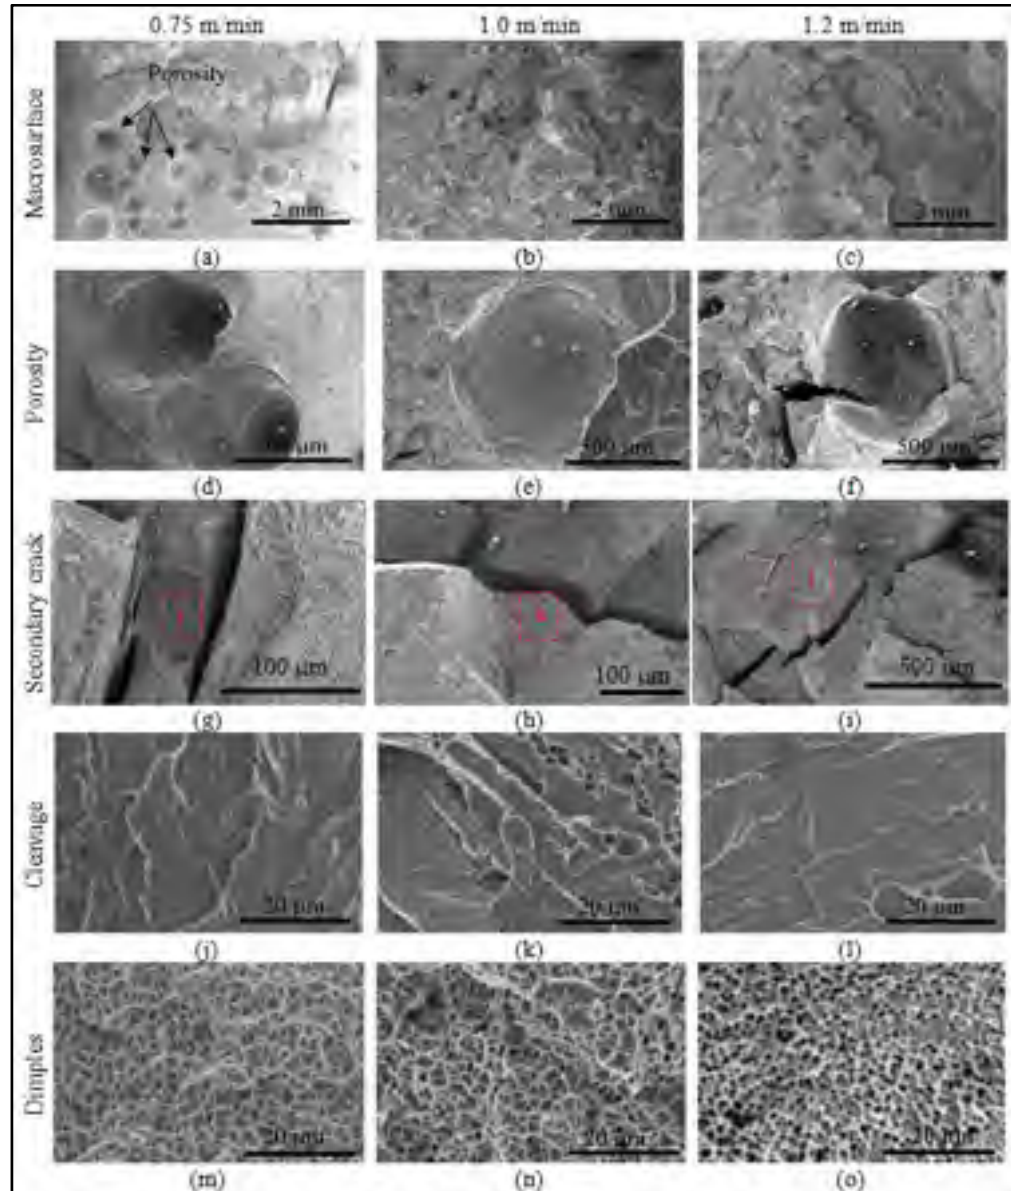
Fracture surfaces of Charpy impact tested samples of the welds assembled at different welding speeds
